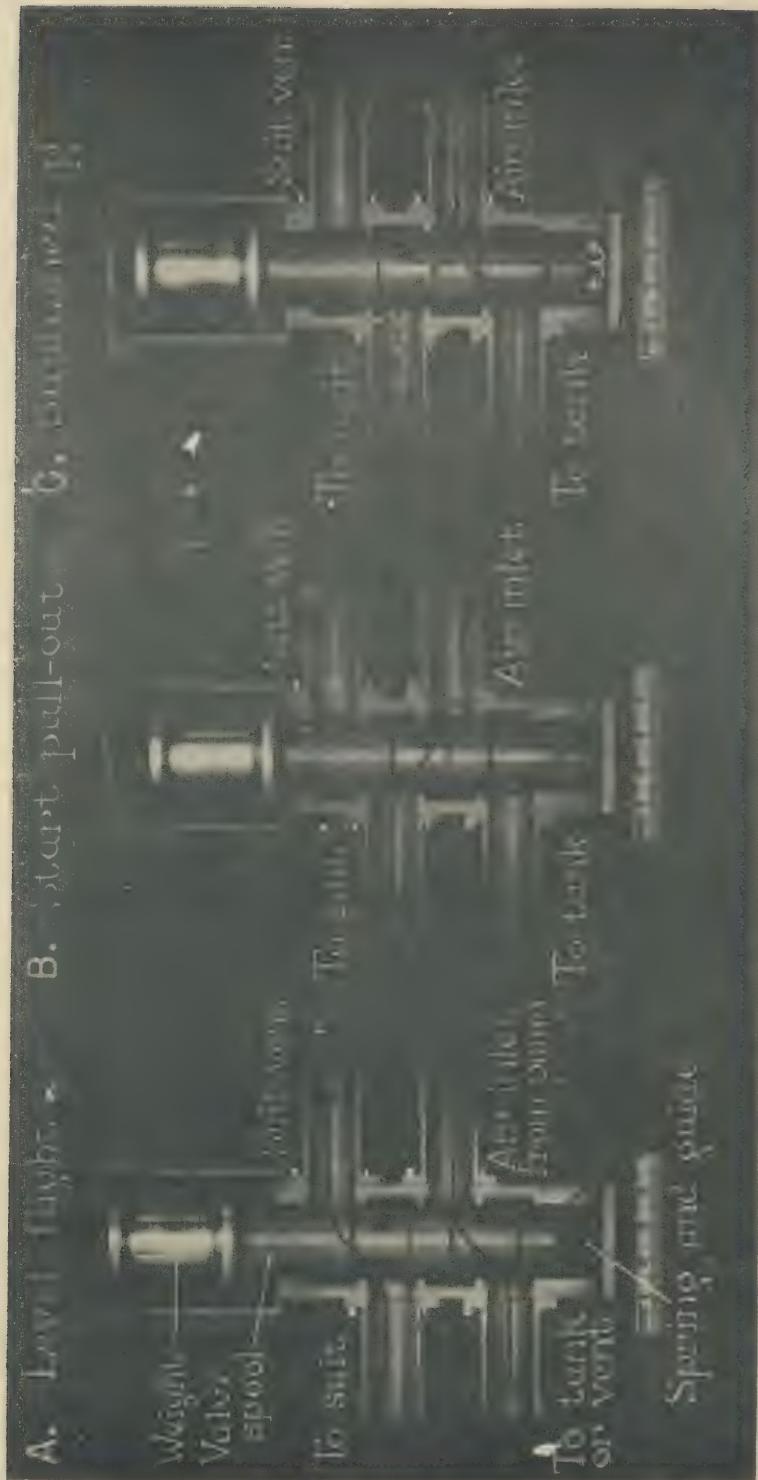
CUTAWAY VIEWS OF CLARK-CORNELIUS VALVE 4536 G. A.M.L.
